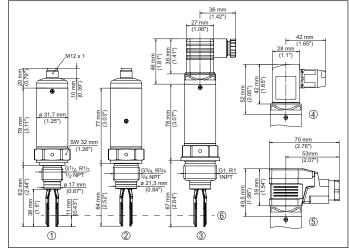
VEGASWING, high temperature versions, threaded fittings
